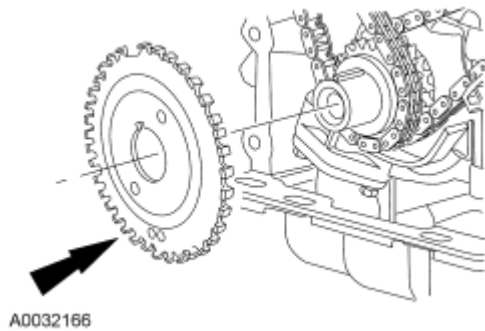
View Of Crankshaft Sensor Ring At Crankshaft
